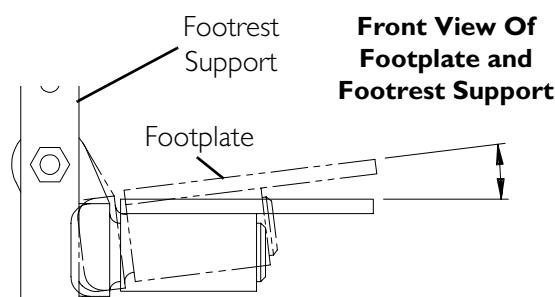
Adjusting Adjustable Angle Flip-up Footplates - Angle
